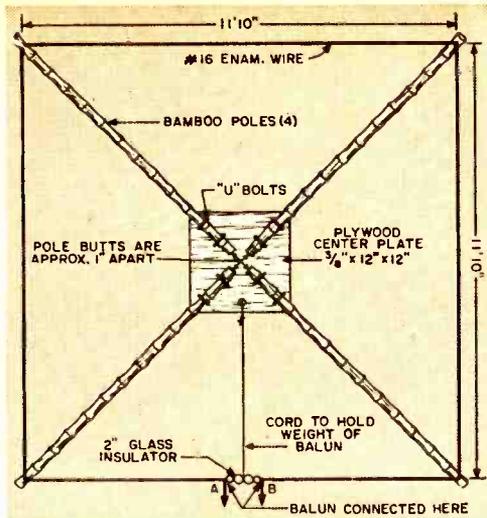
Antenna assembly is held together by U-bolts attached to center plate.
